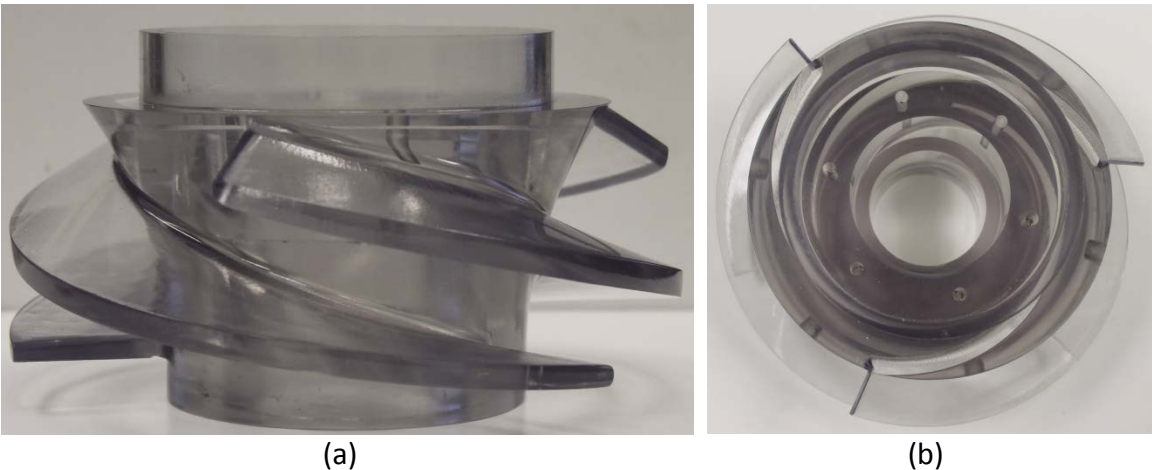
Picture of Clear Pump Impeller a. Front View B. Top View
